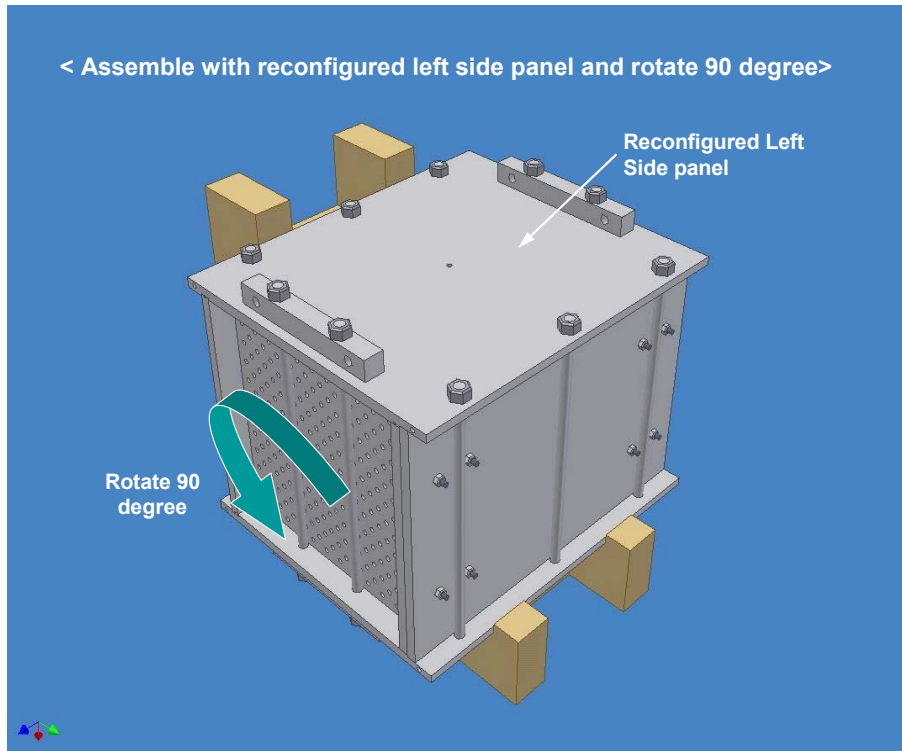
Step 49 (assemble with re-configured left side panel and rotate 90 degree)
